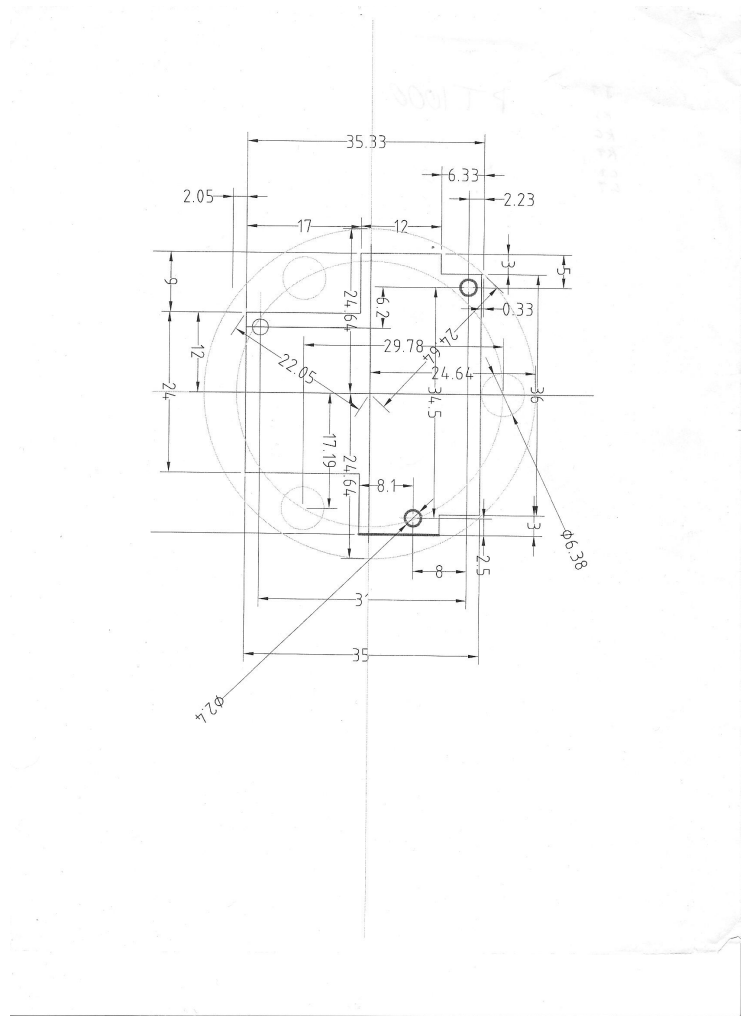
CAD file for PCB and copper sample base screw alignment and dimensions - in cooperation with physics machine shop.
